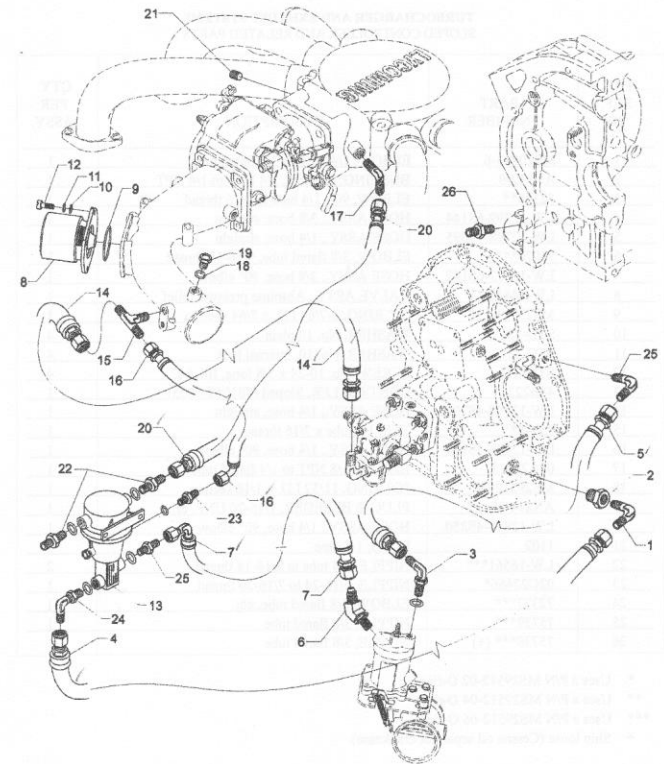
SLOPED CONTROLLER AND RELATED PARTS
